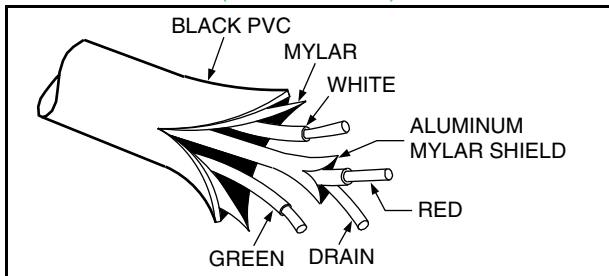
Extension Cable Assembly (Part # 0061101) Shielded per Figure 5
